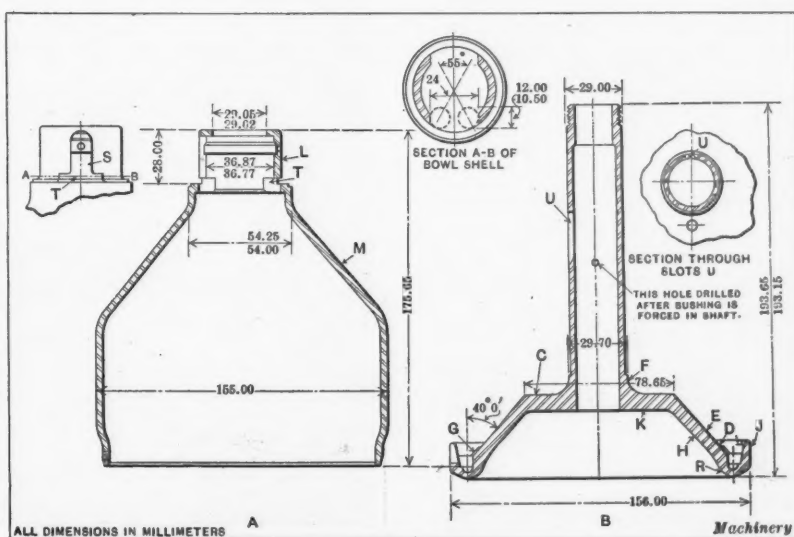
Sectional Views of the Bowl Shell and Tubular Shaft of a Cream Separator
